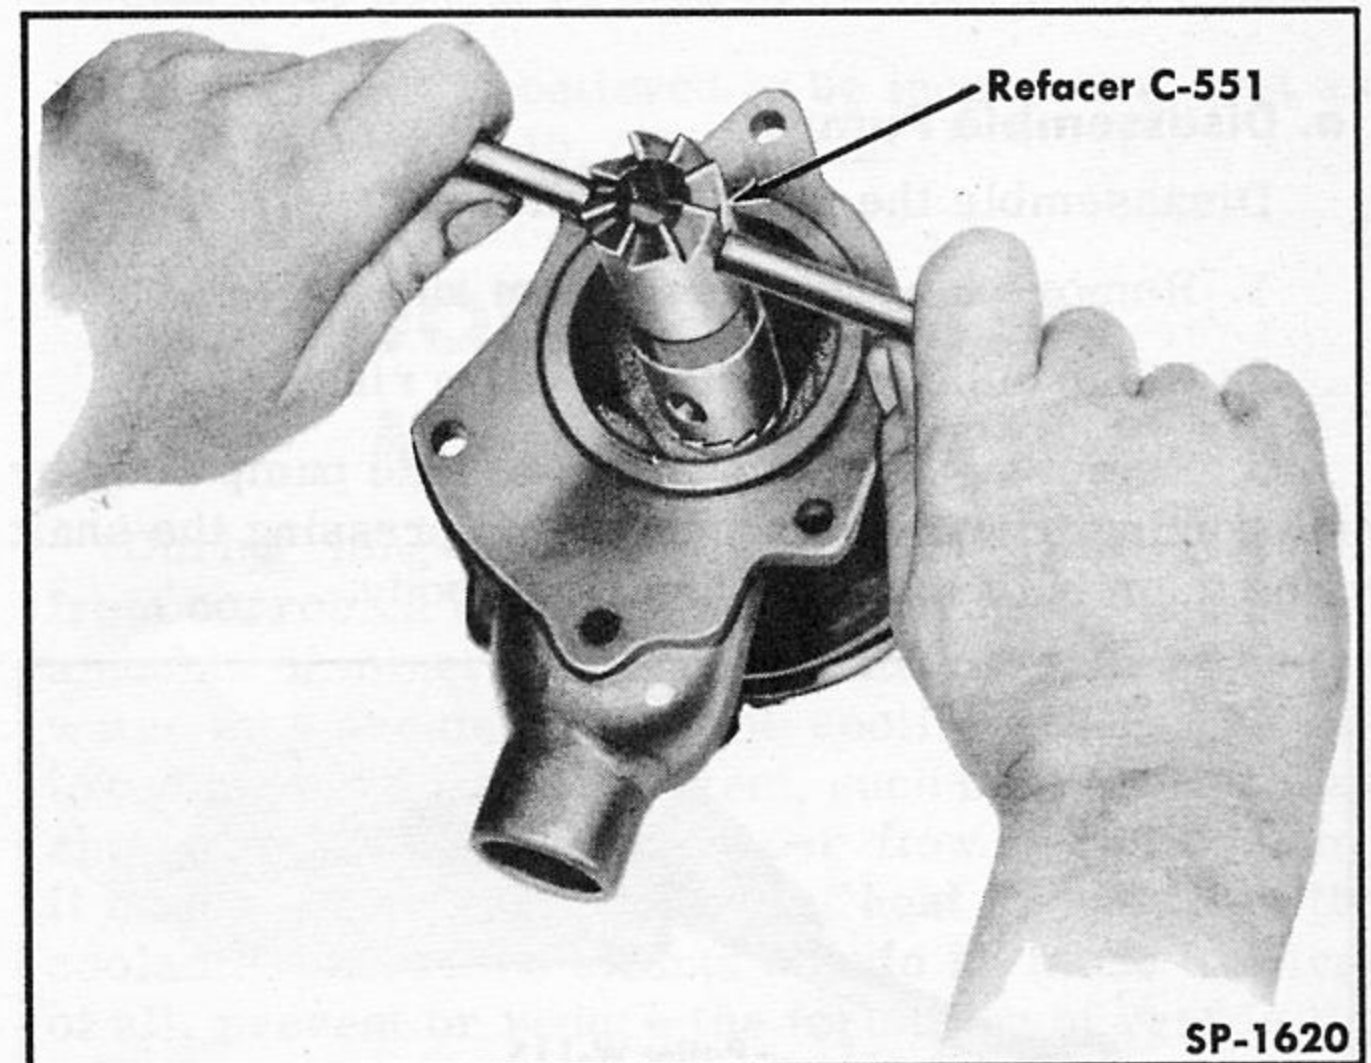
Refacing Seat in Water Pump Body—4 Cylinder
